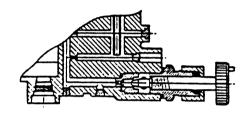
IDENTIFICATION OF CARBURETTORS.
